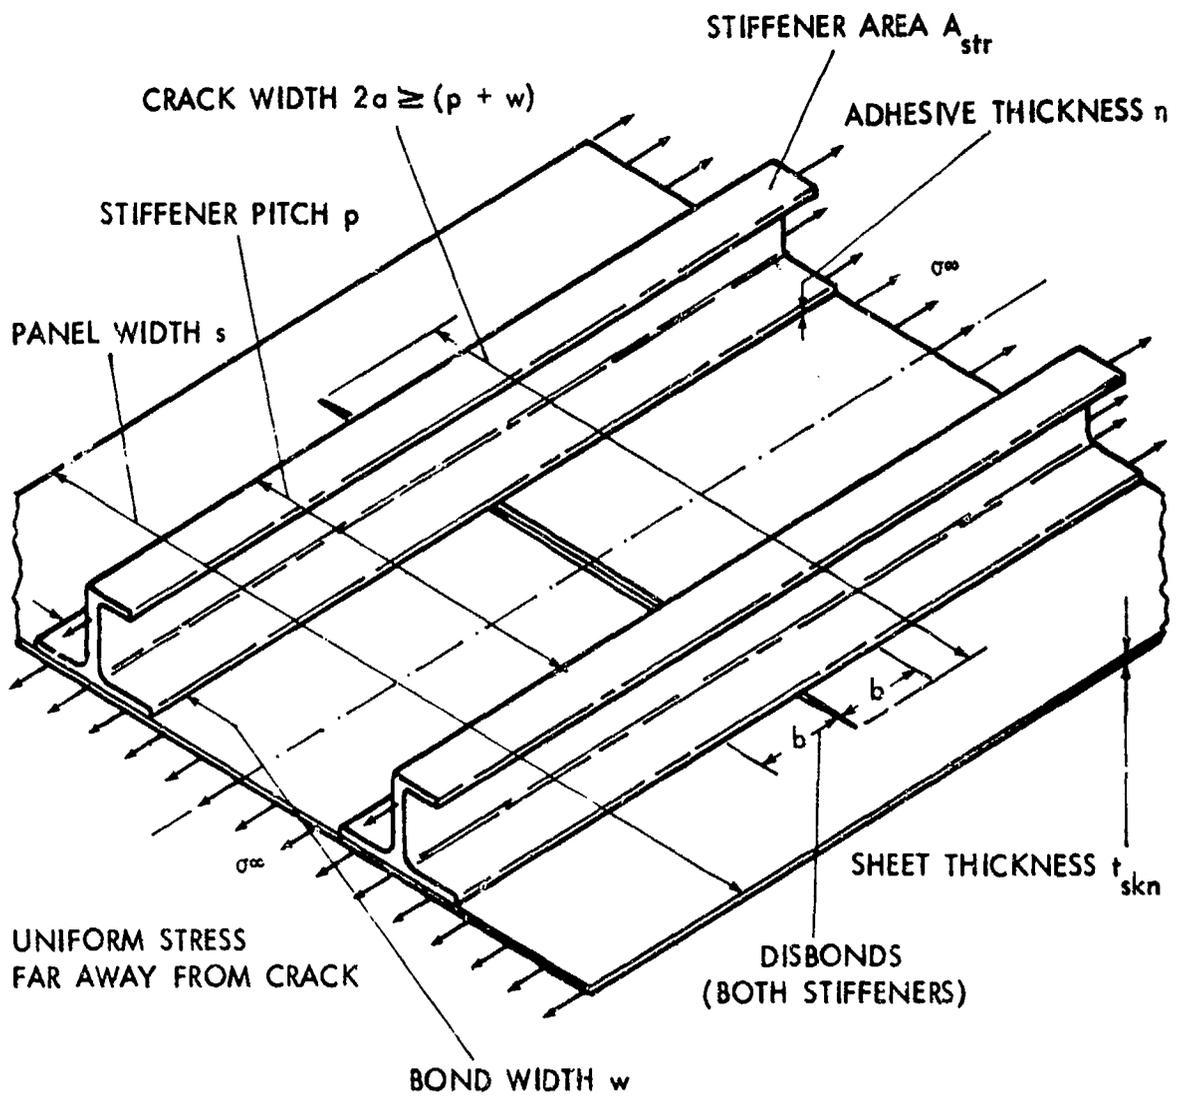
ONE-BAY SHEET CRACK RESTRAINED BY BONDED STIFFENERS
